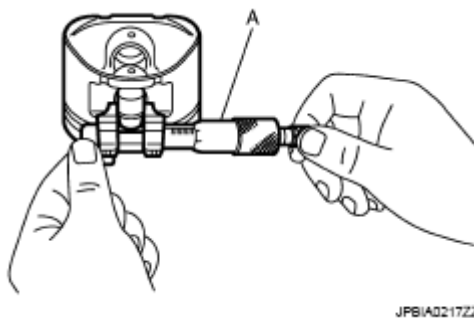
Measuring Inner Diameter Of Piston Pin Hole
